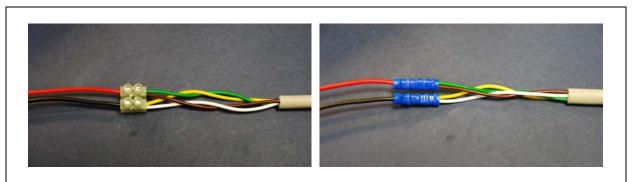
Cable to PSU wiring, terminal block (left), crimps (right)
